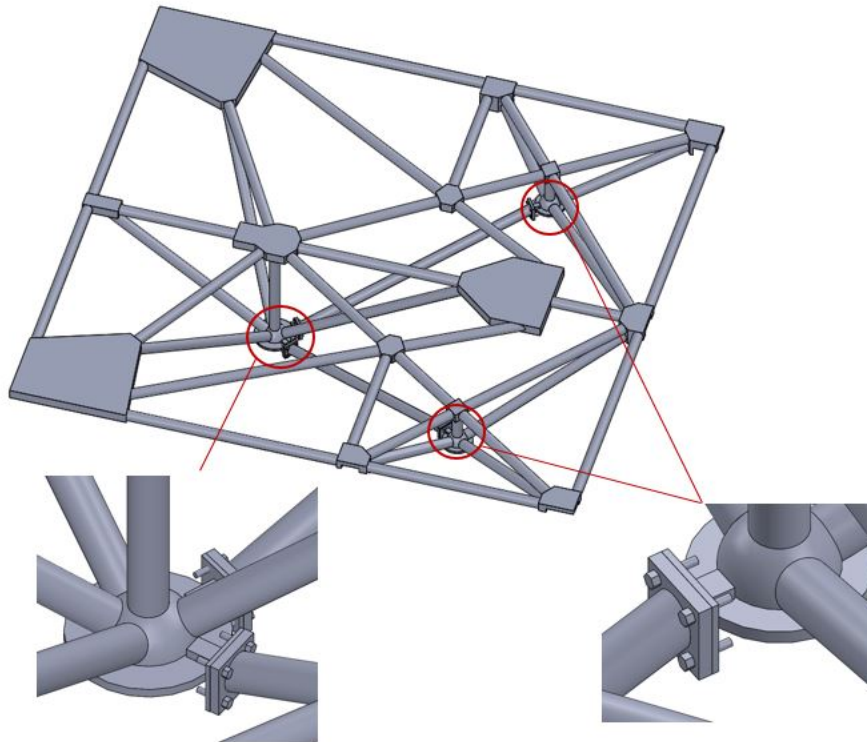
Interface between welded base frame part and the bolted reinforce beam elements
